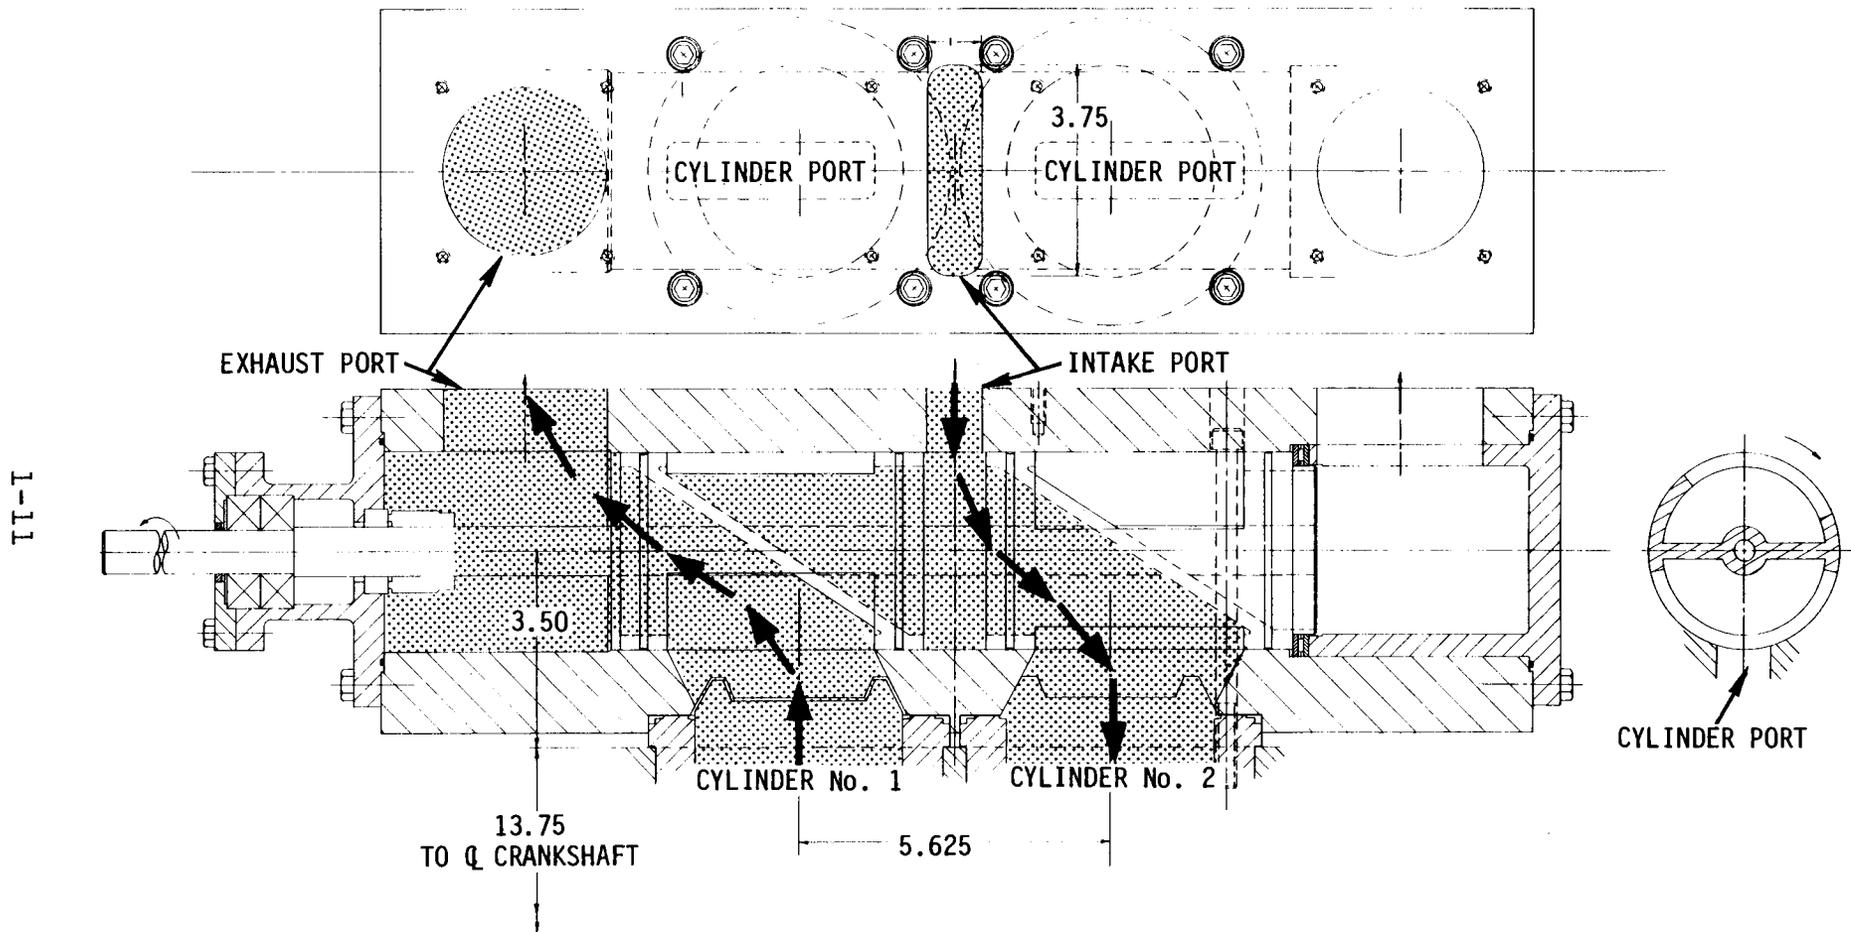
Operation of Rotary Valve Assembly, Showing Cylinder No. 1 Exhausting and Cylinder No. 2 on the Intake Stroke
